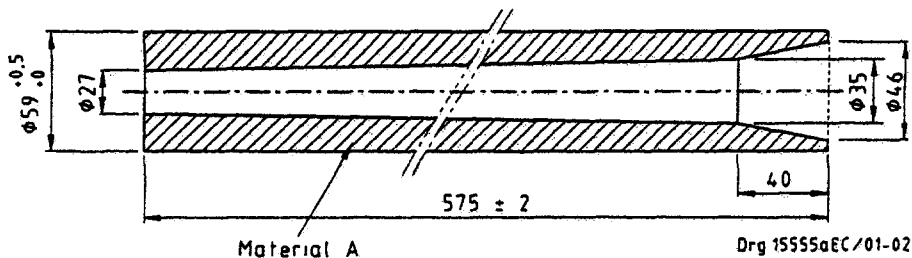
Stopping device (polyurethane tube) — Rear impact dimensions
